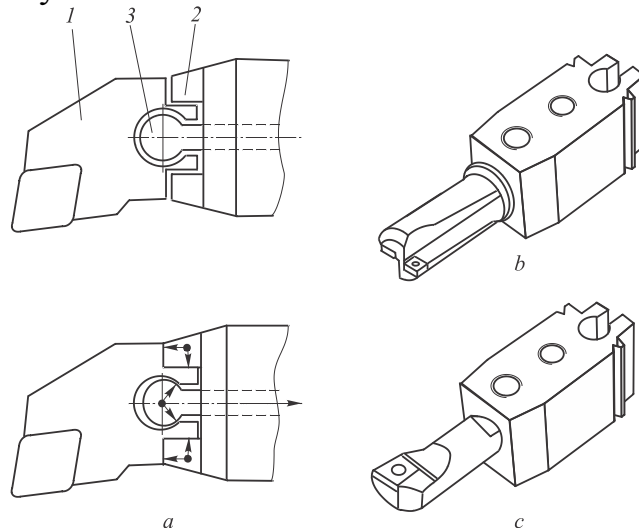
Turning inserts: (a) insert clamping; (b) drill holder; (c) cutter holder
